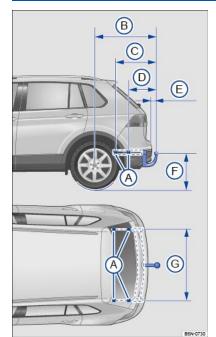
Dimensions and attachment points for retrofitting a towing bracket.
